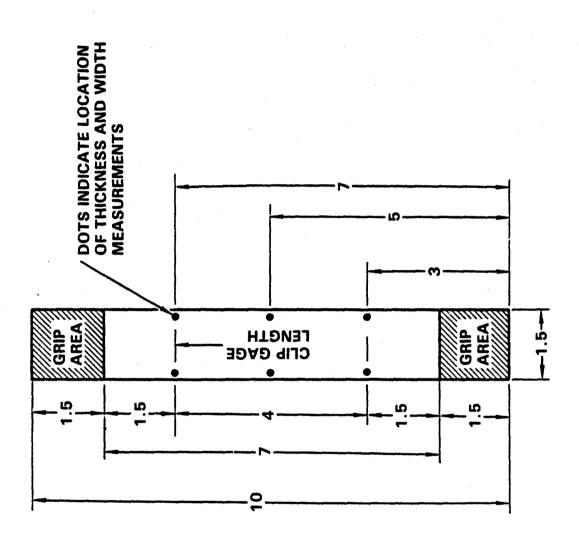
Edge Delamination Tension Test Specimen (Dimension Are In Inches).
